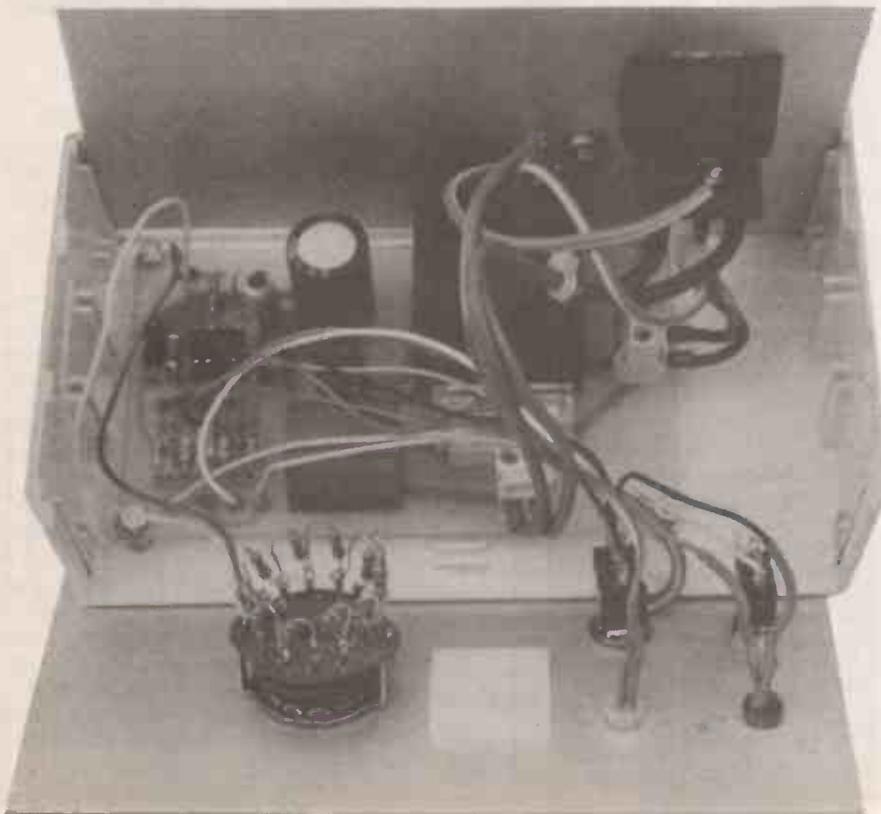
Interwiring from the circuit board to the front and rear panels. The Earth lead from the rear panel solder tag to the front panel can be "earthed" under either switch S1 or S3 mounting washer. The completed unit showing layout of components inside the case is shown below. Where the mains leads are soldered to the output socket SK1 the solder joints and tags should be covered with plastic sleeving.
